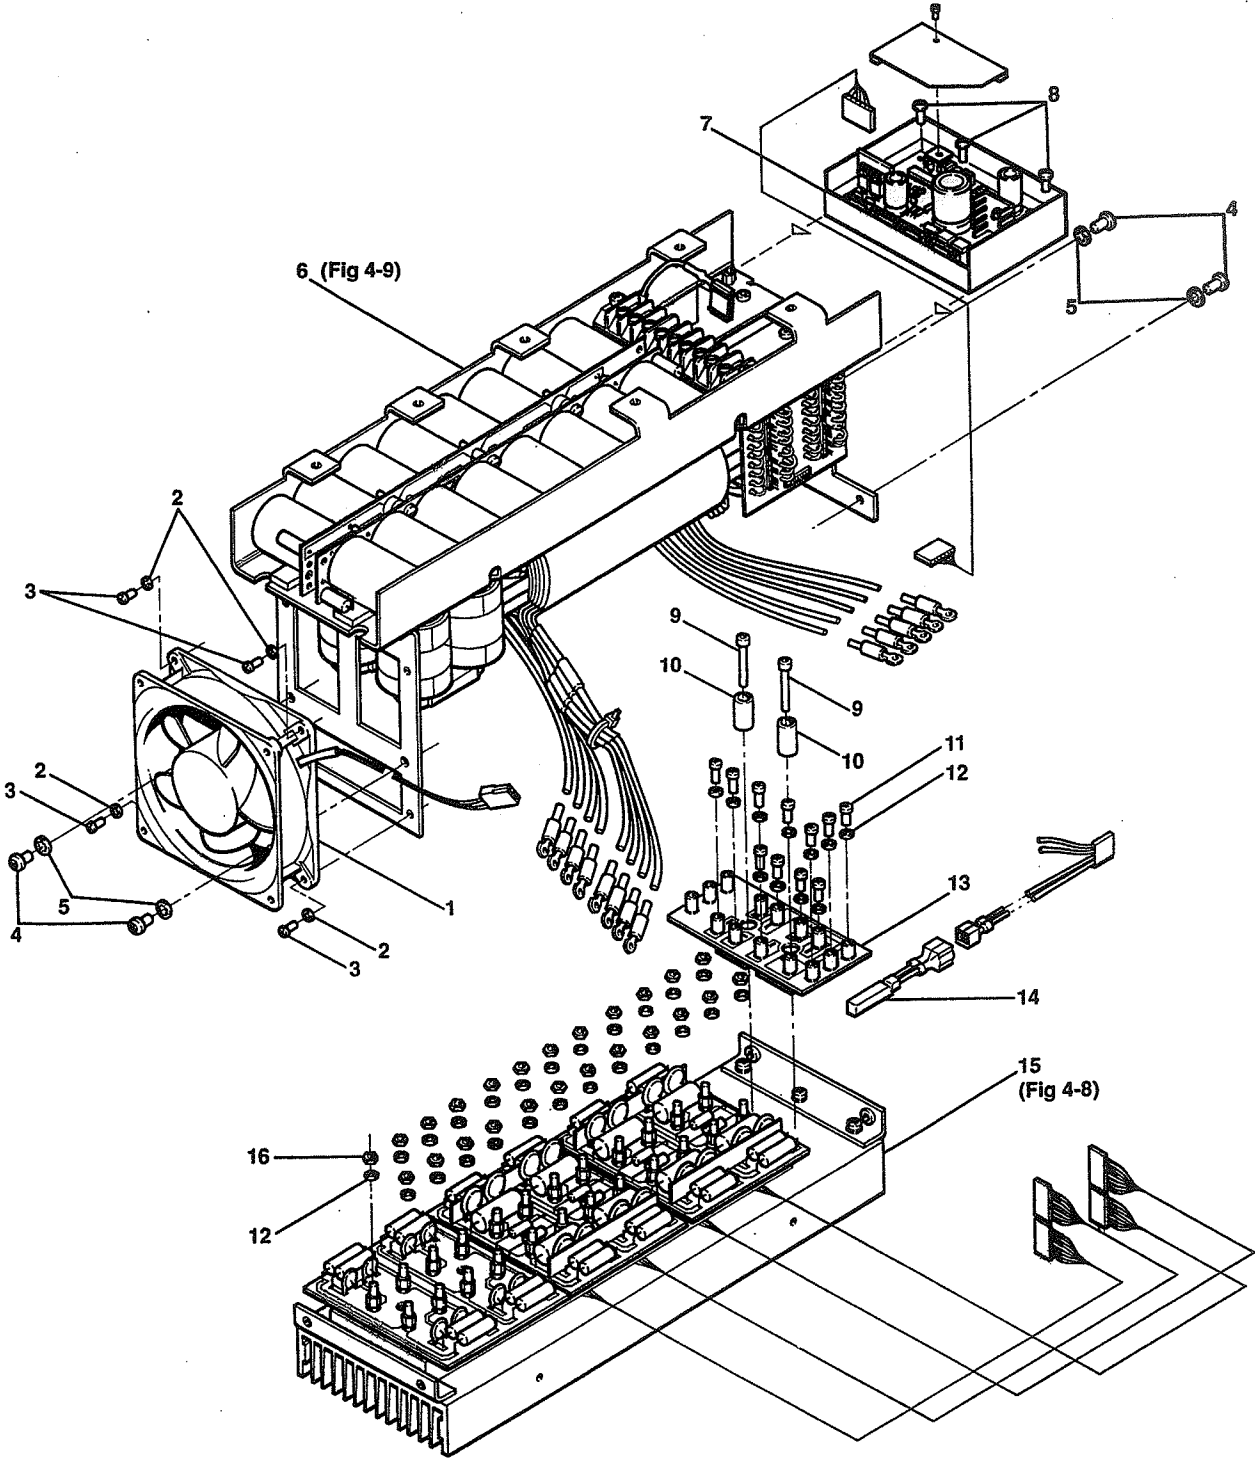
Inverter Subsystem Assembly - Exploded View
